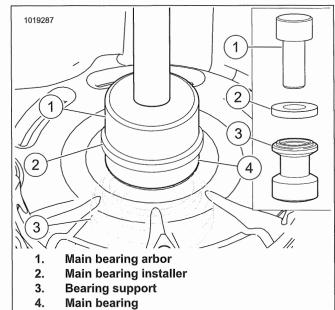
Install Left Main Bearing SPROCKET SHAFT BEARING INNER RACE
